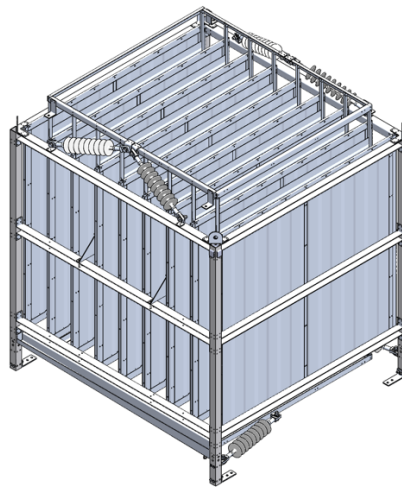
WaterPanel™ system installed on the fan exhaust of the cooling tower at our partner site
